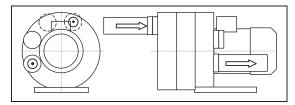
2BH723 ... 2BH763 (three-impeller pumpmotor units with three-stage design)
